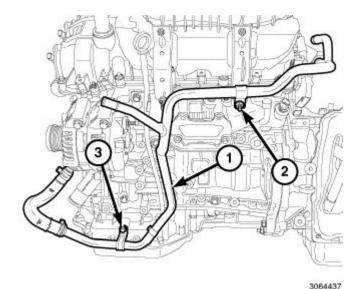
Heater Core Return Tube, Nut & Bolt Courtesy of CHRYSLER GROUP, LLC
